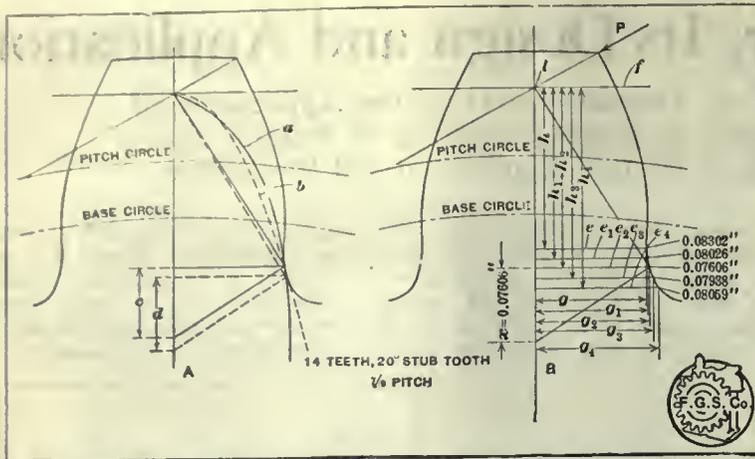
TWO METHODS OF DETERMINING WEAKEST SECTION OF GEAR TOOTH. A SHOWS METHOD OF CONSTRUCTING A PARABOLA BY DRAWING AN IRREGULAR CURVE. B SHOWS METHOD OF CALCULATING WEAKEST SECTION OF TOOTH.
